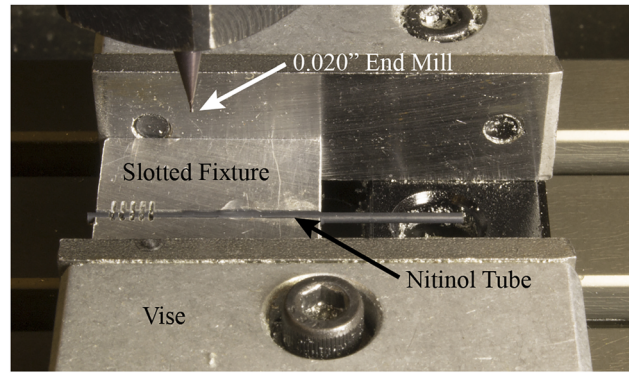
The fixturing setup used for the CNC manufacturing process. The slotted aluminum fixture used to make the wrists, with a nitinol tube glued into the fixture, is held in place by the CNC vise.
